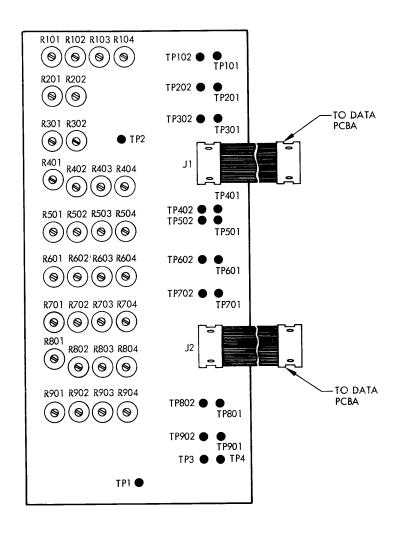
Deskew A PCBA, Connector and Test Point Placement
